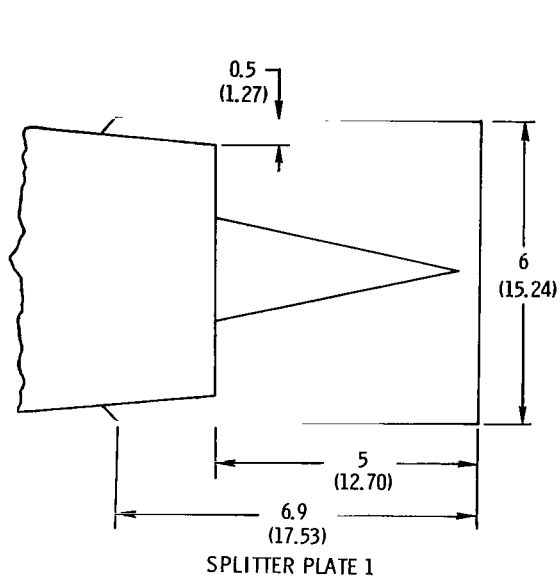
Dimensional drawings of mounted splitter plates. All dimensions are in inches (dimensions in parenthesis are in centimeters).
